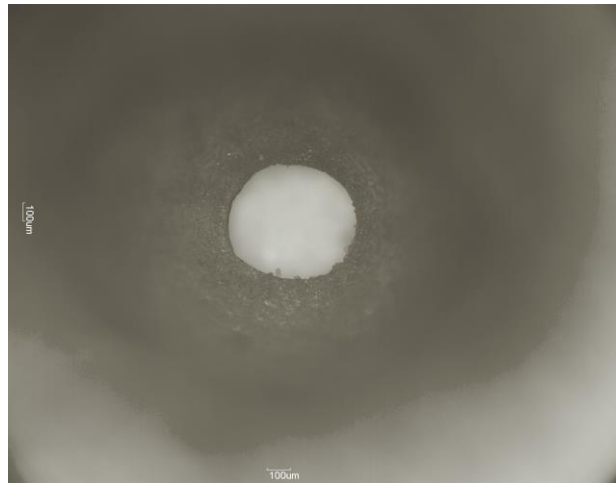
SEM picture view of exit side of the machined hole (machining voltage of 18V, machining current of 3A, frequency of 120Hz, duty cycle of 40%).
